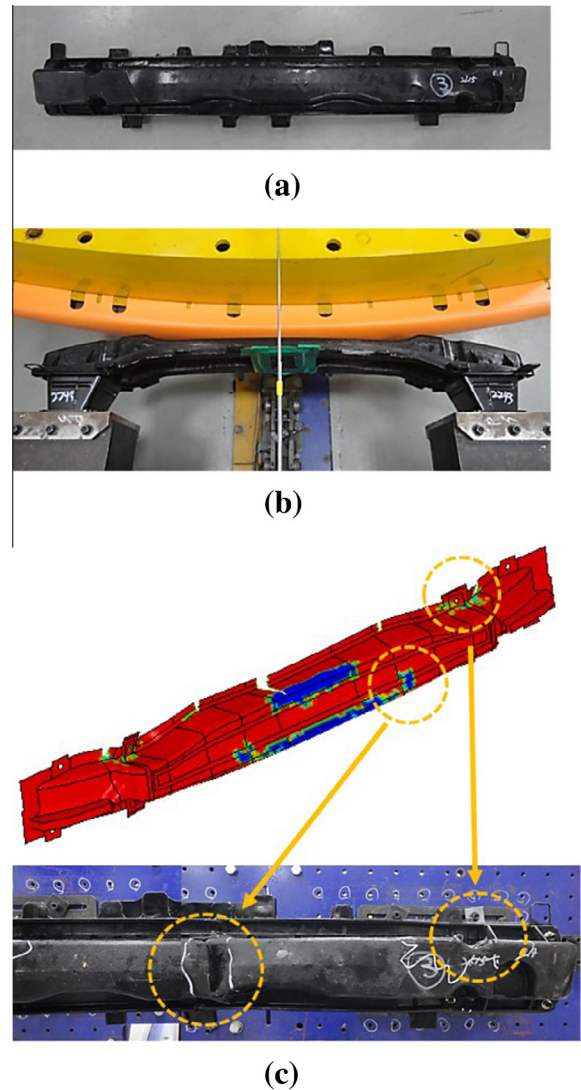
Manufactured hybrid bumper beam and impact test: (a) finally designed hybrid bumper beam; (b) bumper impact test; (c) fracture of bumper beam after impact simulation and test.
